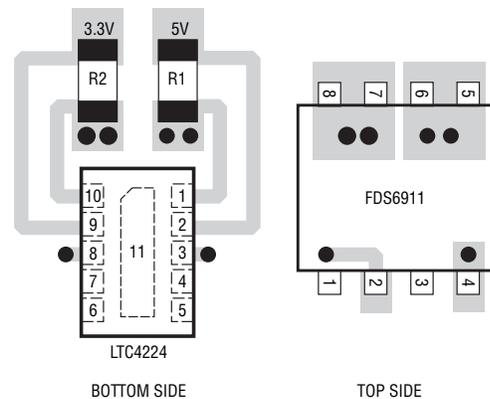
A compact PCB layout of the sense resistors, MOSFET and the LTC4224
